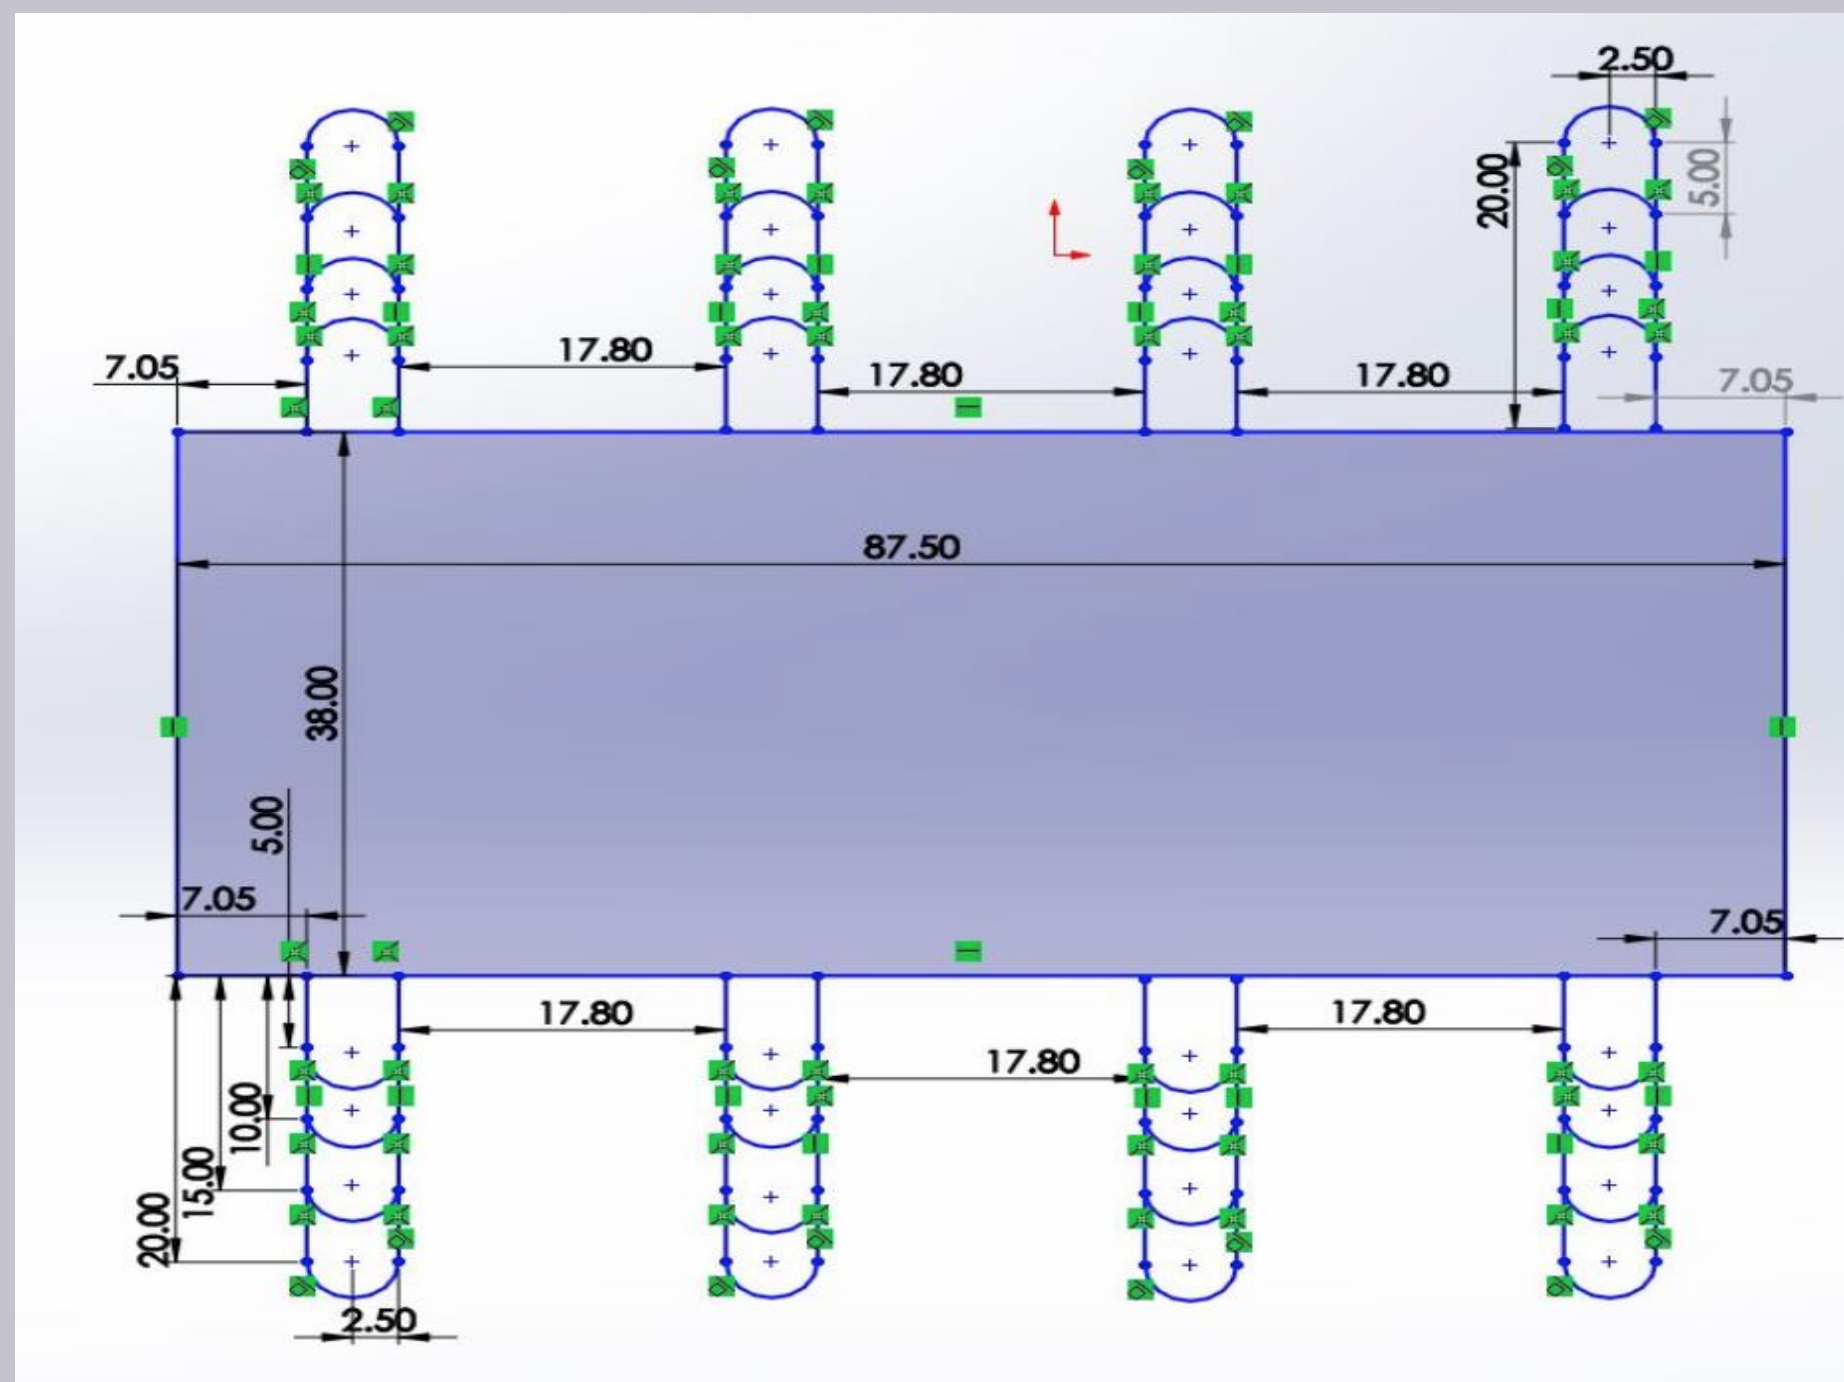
The Solidworks drawing is the planned prototype. This would be taken to consult with Angola Canvas before ordering the prototype and would be adjusted as needed based on prototype testing results.
